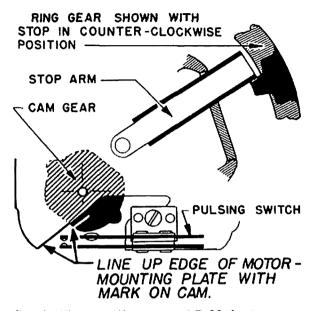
When putting your AR-22 back together, the line on the cam should line up with the edge of the motor-mounting plate as shown here. The ring gear should be against the stop arm in the counterclockwise position.
